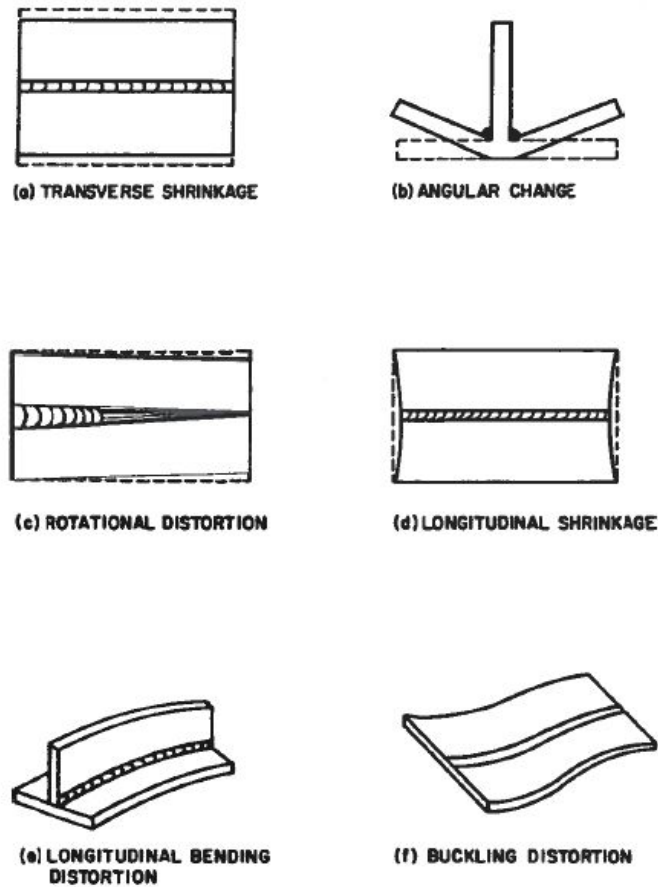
Types of distortion induced by welding (Masubuchi, 1980).
